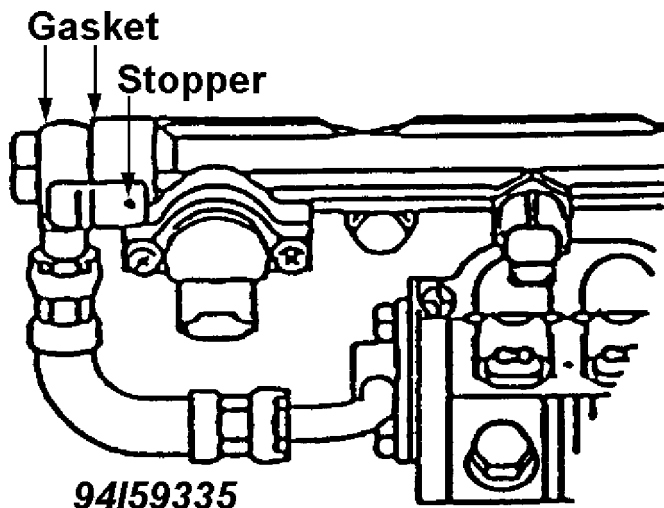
Installation of Fuel Hose on Secondary Fuel Distributor
